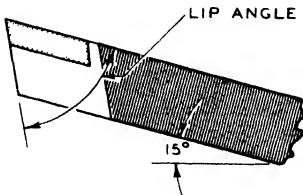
A Thin Cutting Edge is Undesirable in the Carbides
